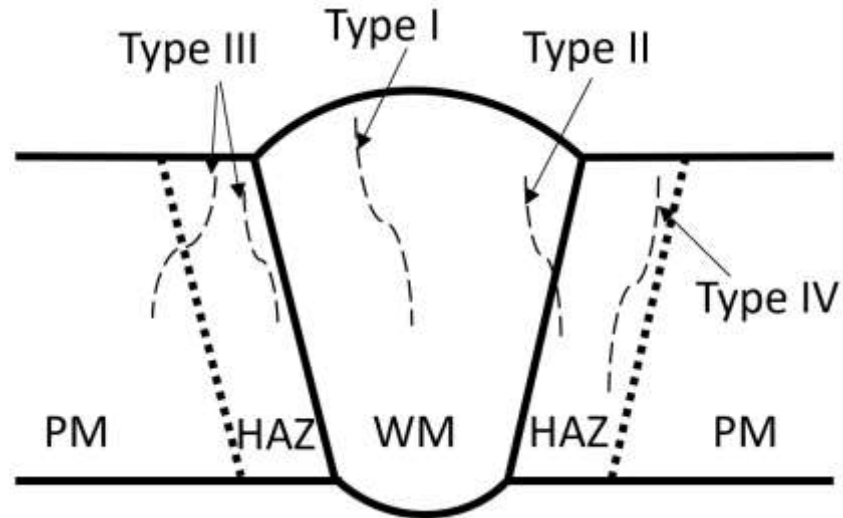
Schematic diagram of the welded joint, showing different types of cracking.
